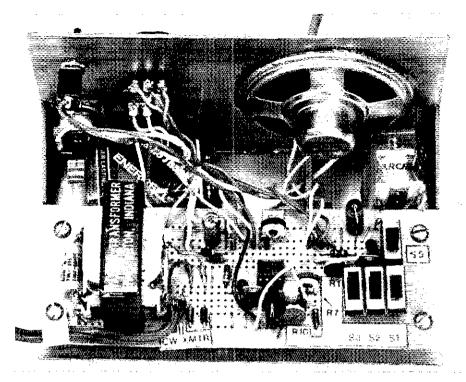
A close-up of the component layout. The components should be identified easily in the schematic, with a bit of study.
